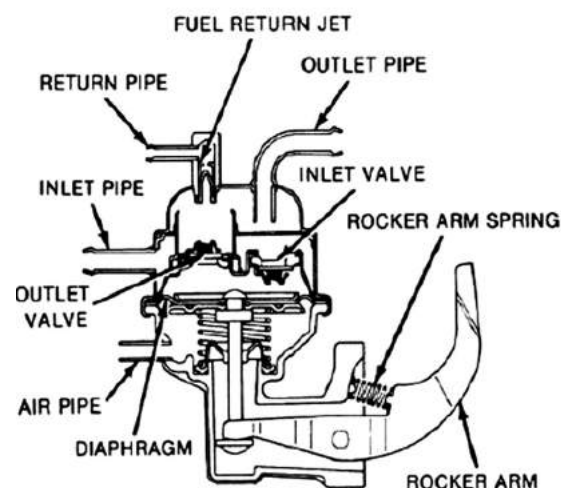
(a) Schematic of A.C. Mechanical Fuel Pump.
